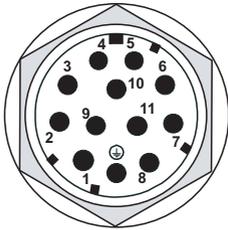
Transmitter and receiver machine interface /T2 (view of the pins)
